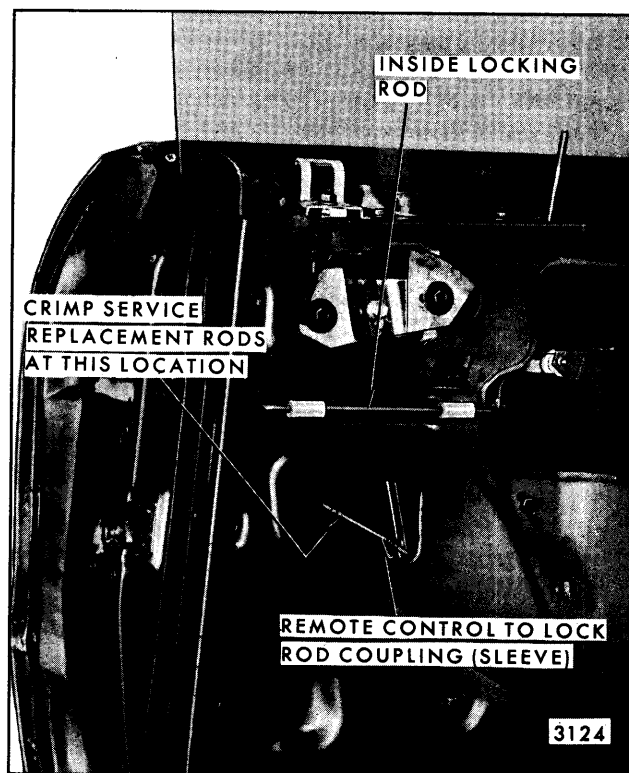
Front Door Inside Locking Rod - Coupe Styles
